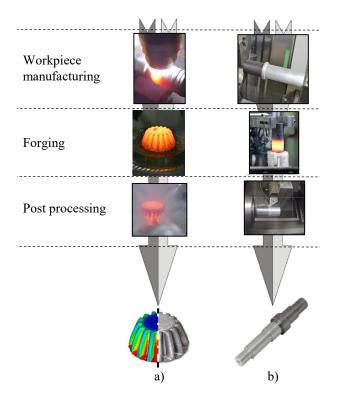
Manufacturing process of a) the bevel gear: depositing welding, forging and quenching and b) the shaft: friction welding, forging and machining.
